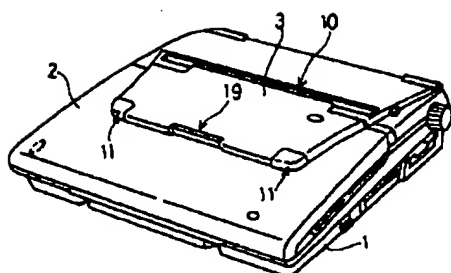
It is view drawing which looked at (d) in above-mentioned drawing 30 from Q.
